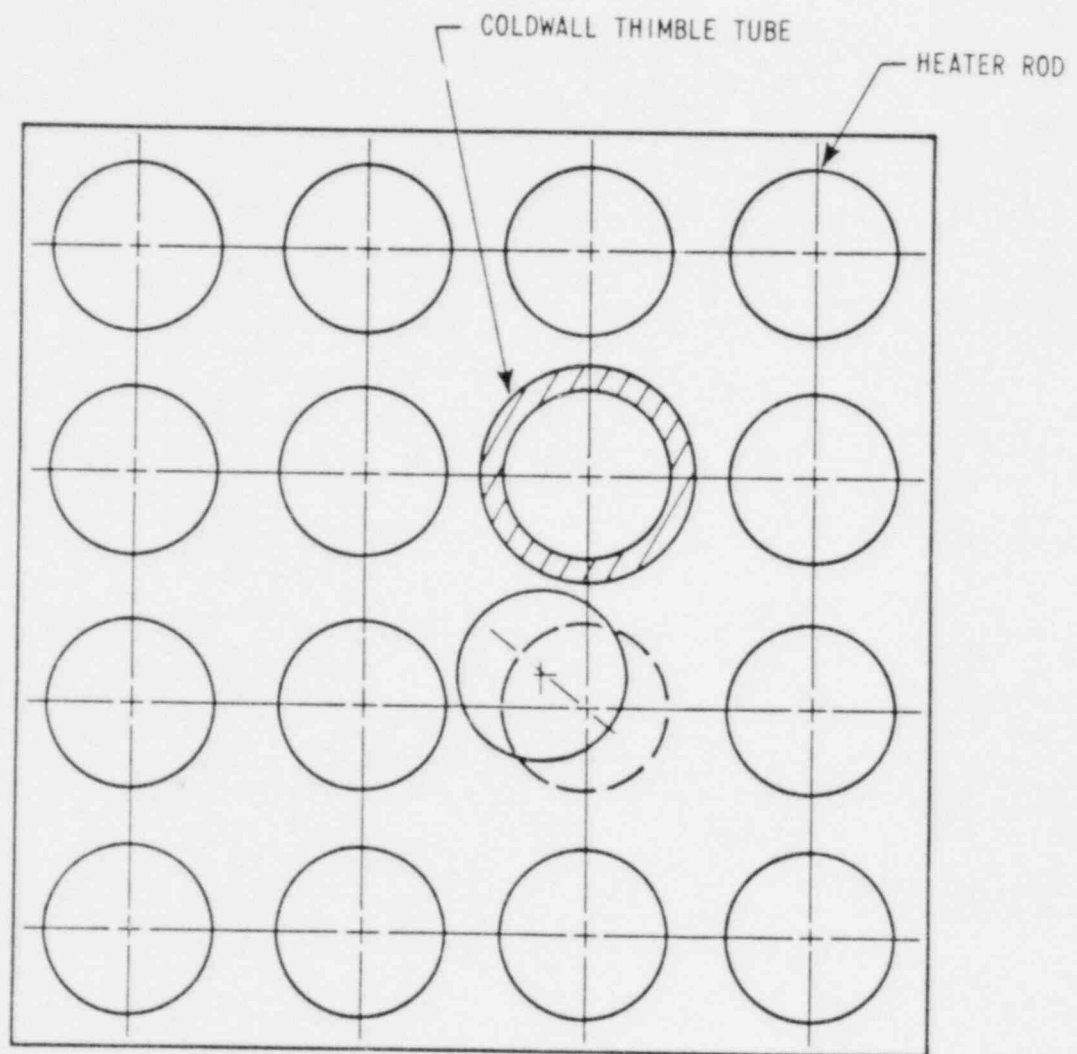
Partial Rod Bow Test Section, 85 Percent Closure
